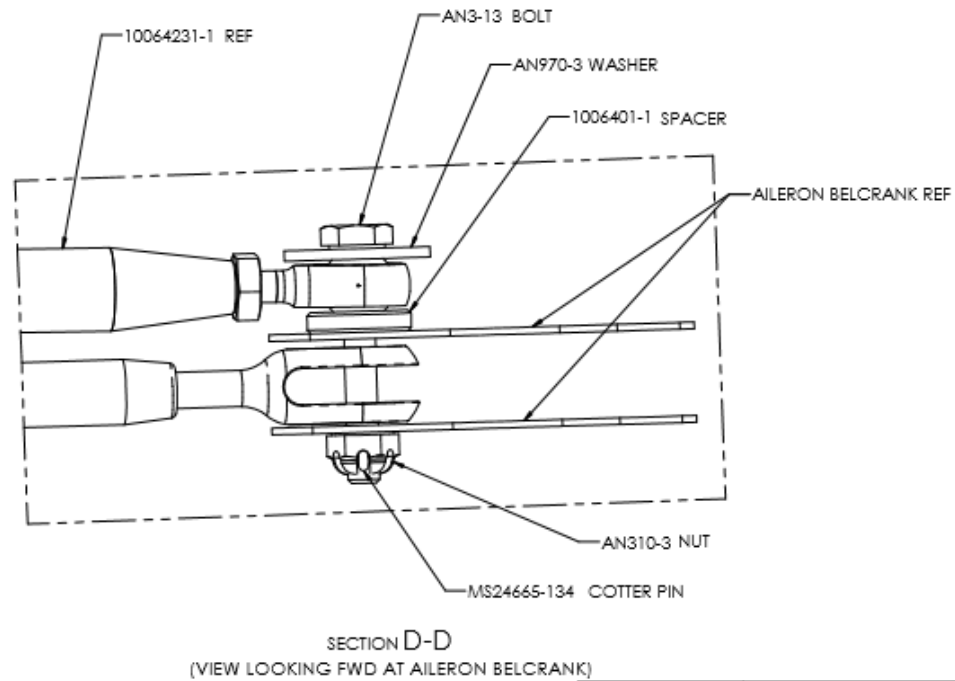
AILERON BELLCRANK INSTALLATION
